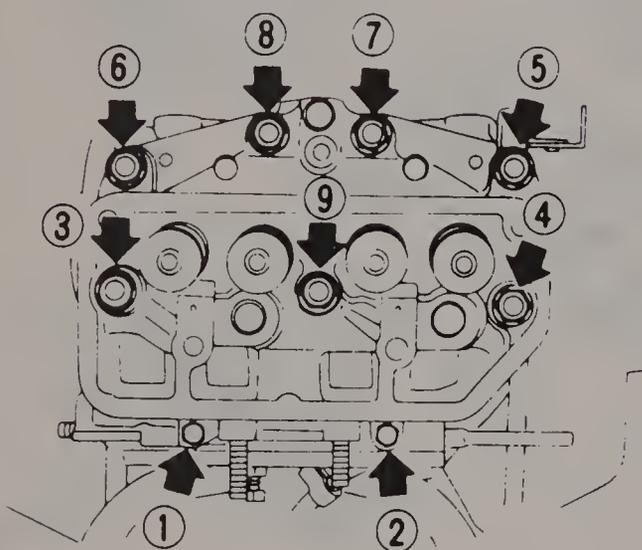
Cylinder head bolt/nut loosening sequence (Sec 12)
